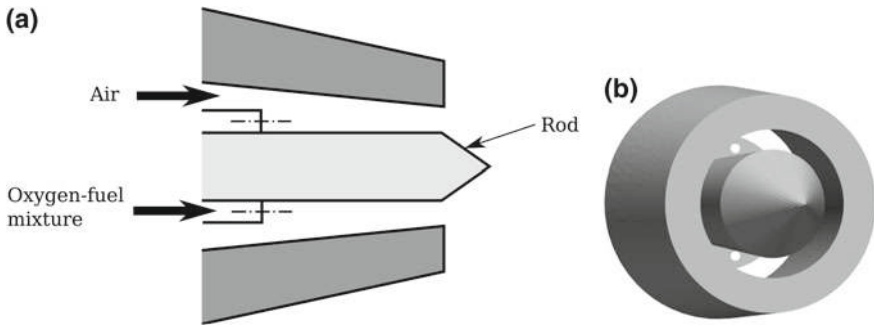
a Sketch of the nozzle with an annular air inlet and orifices for the oxygen-fuel mixture inlet and b front view of the 3D nozzle geometry
